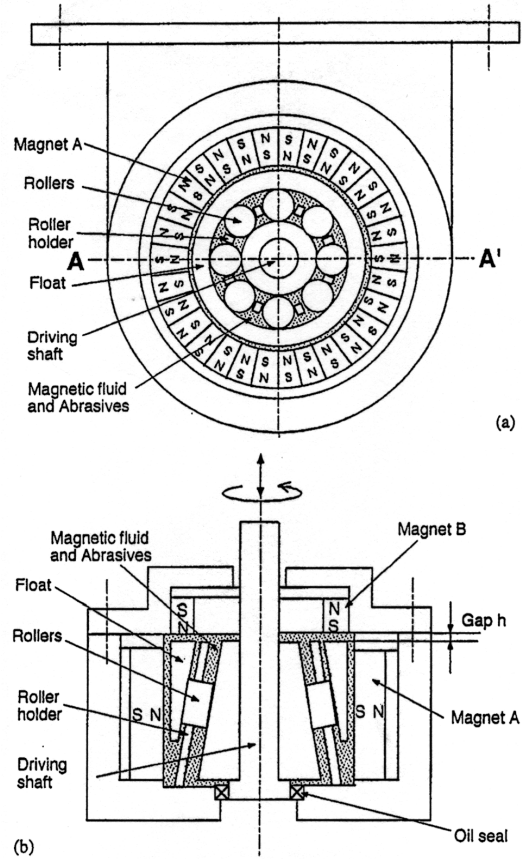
Magnetic float polishing equipment for ceramic rollers (a) top view
